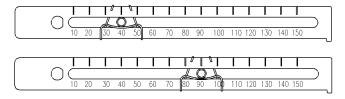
Pin Insertion when valve stroke is 40mm (up) and is 90mm (bottom)
